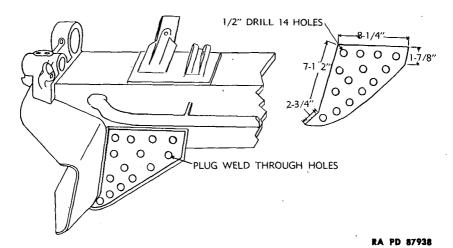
Plate To Be Welded to Both Sides of Left Trail and to Outside of Right Trail
